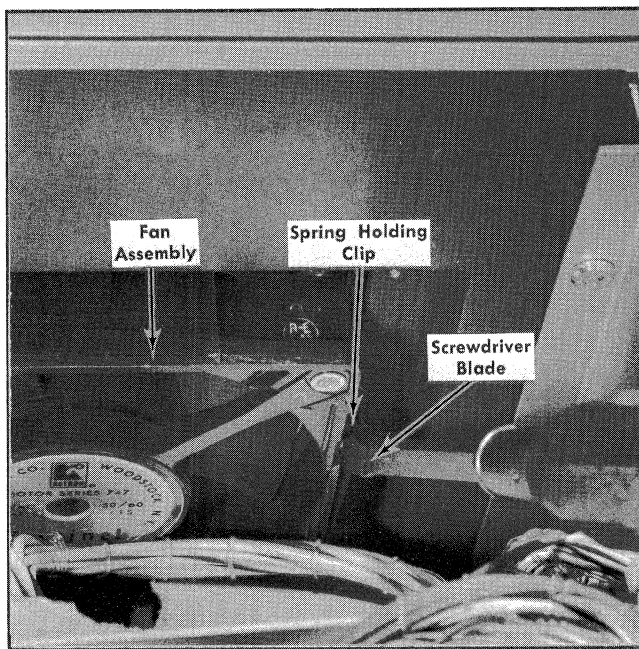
Interior view, showing screwdriver inserted between Fan Assembly and holding clip.
